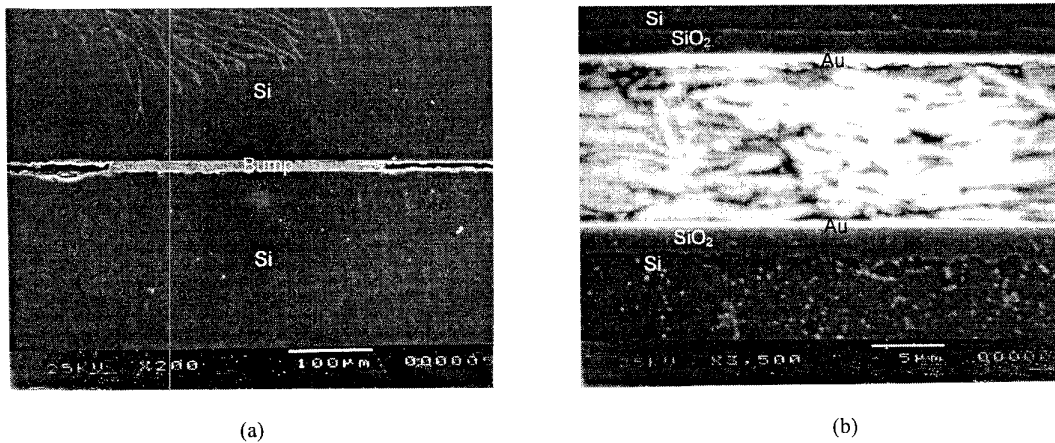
SEM photographs of flip-chip packaging: (a) cross-sectional view of a conductive polymer bump on gold contact pads and (b) close-up view of the bump.
